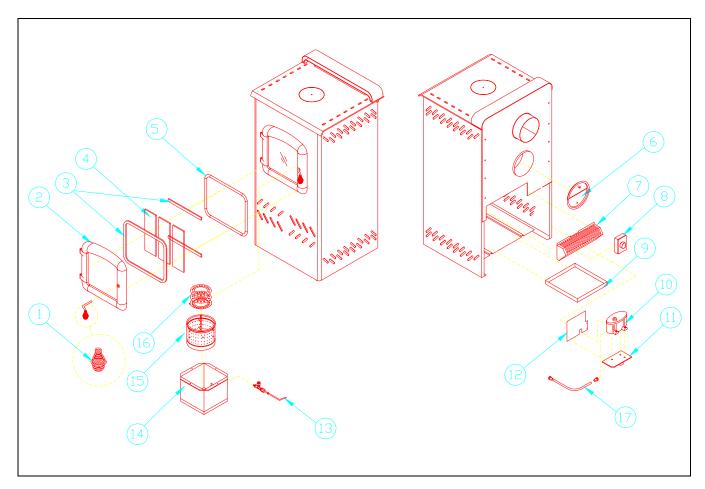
EVEREST EXPLODED VIEW, SPARE PARTS LIST
